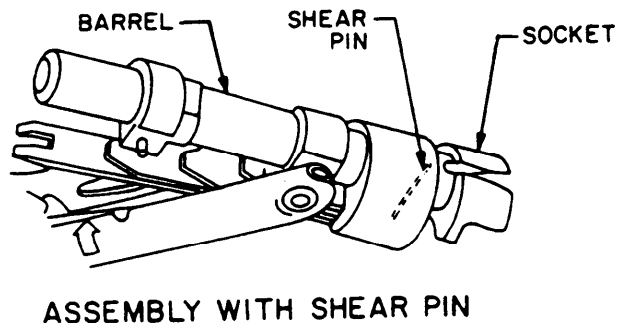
Checking for proper retention of socket by a shear pin.
